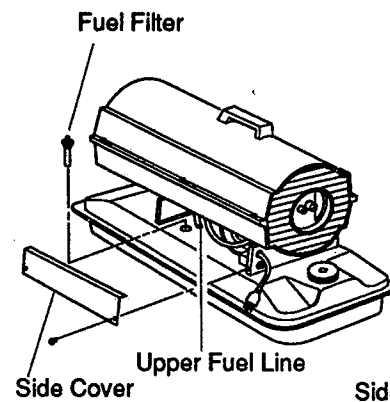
Fuel Filter Removal, 35/50,000 BTU/Hr Models
